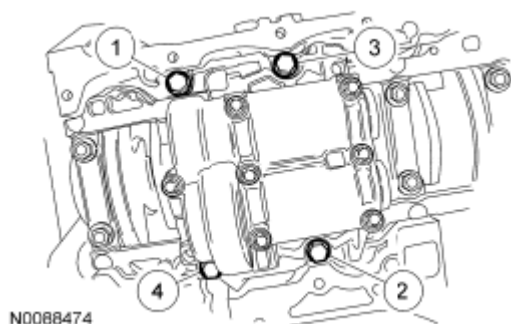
Identifying Balancer Unit Bolts Tightening Sequence
